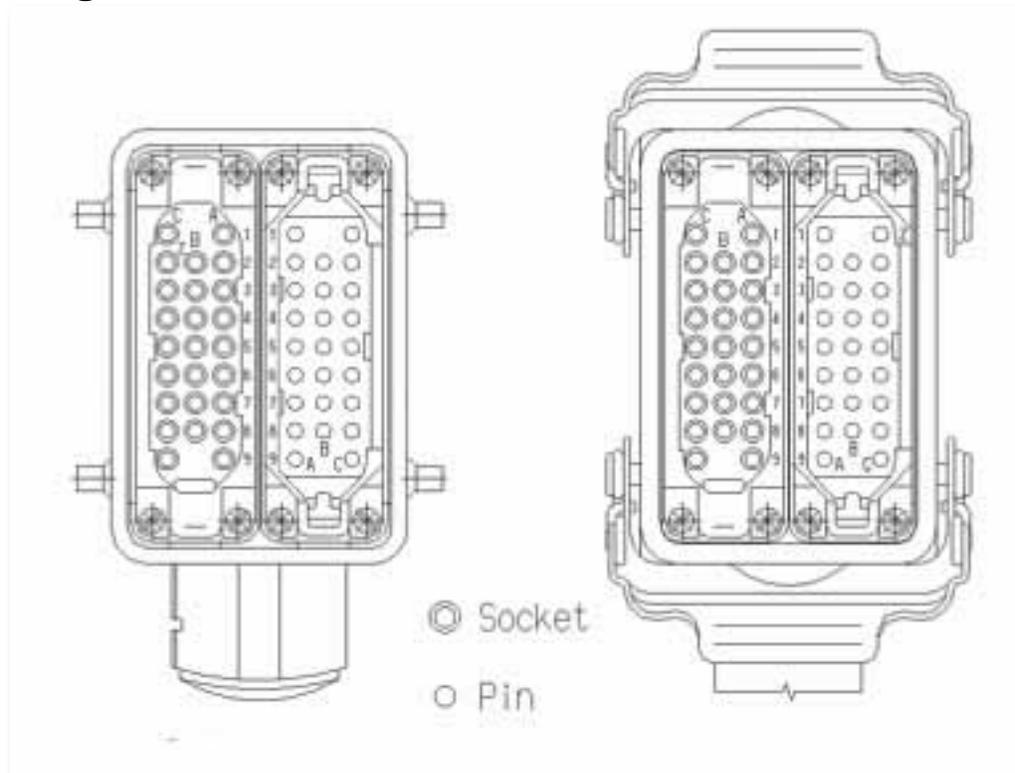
Plug on Handling Device (Left) Plug on Injection Molding Machine (Right)
